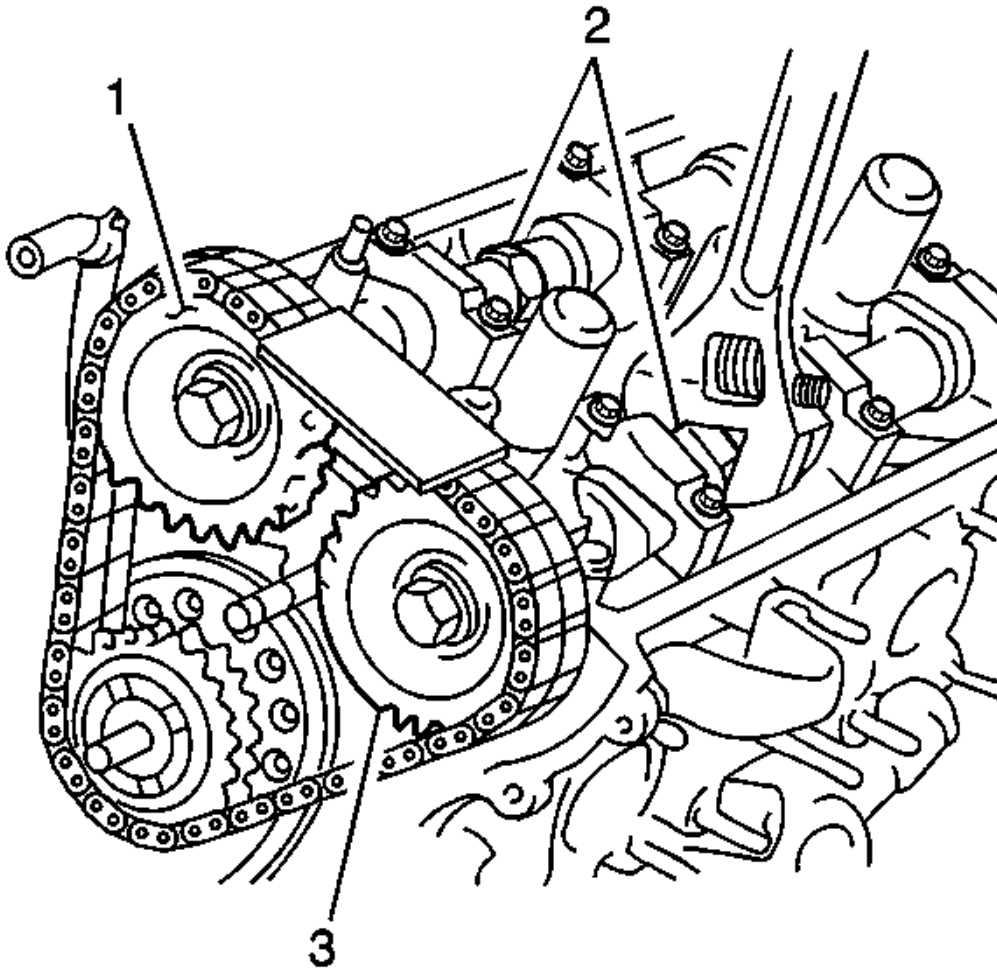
View Of Crankshaft & Match Marks On Sprockets
